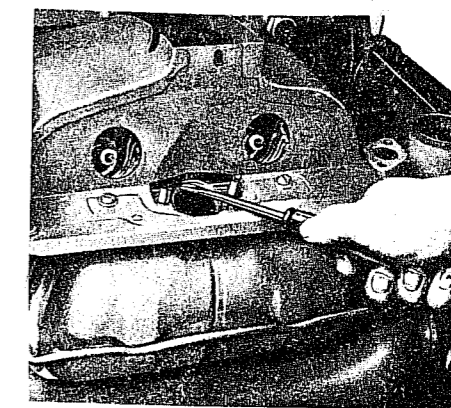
Removing the manifold sealing ring from the cylinder head - 1200 models only.
